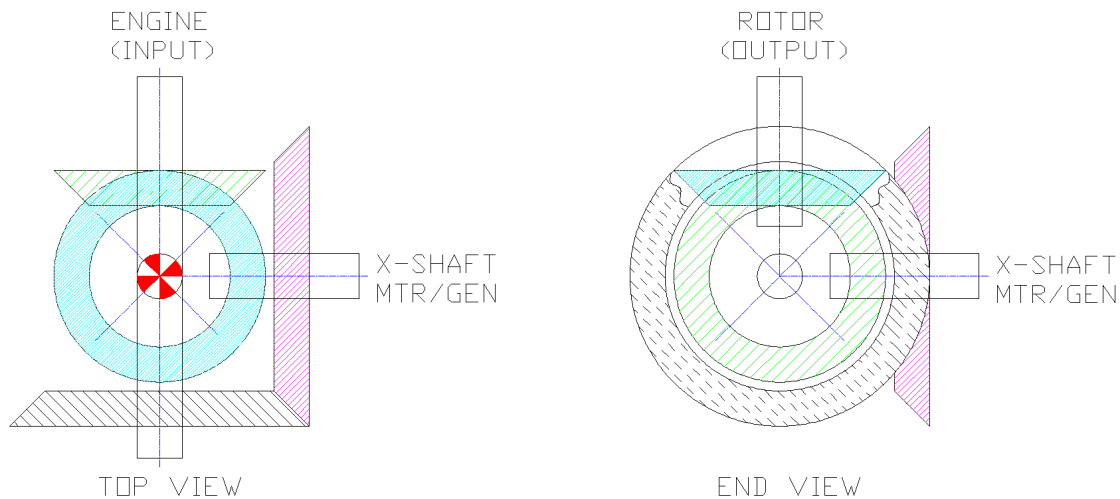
Double right angle gearbox schematic (top view, rotor shaft out of page).
